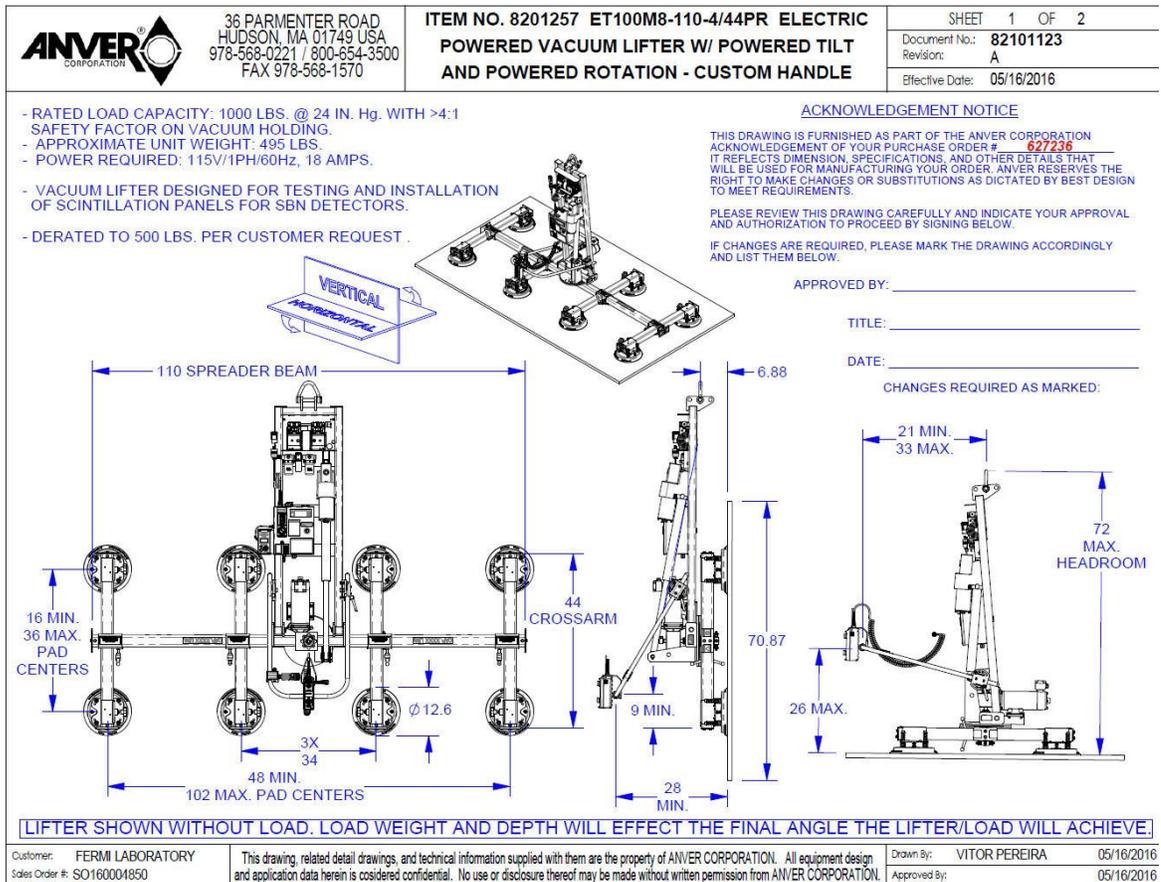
Vacuum Lifting Fixture Design by Anver Corp.
